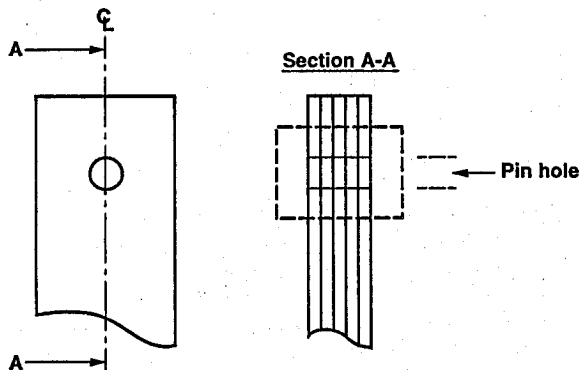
Cross section through fiber/metal laminate bearing specimen center for failure modes observation.
